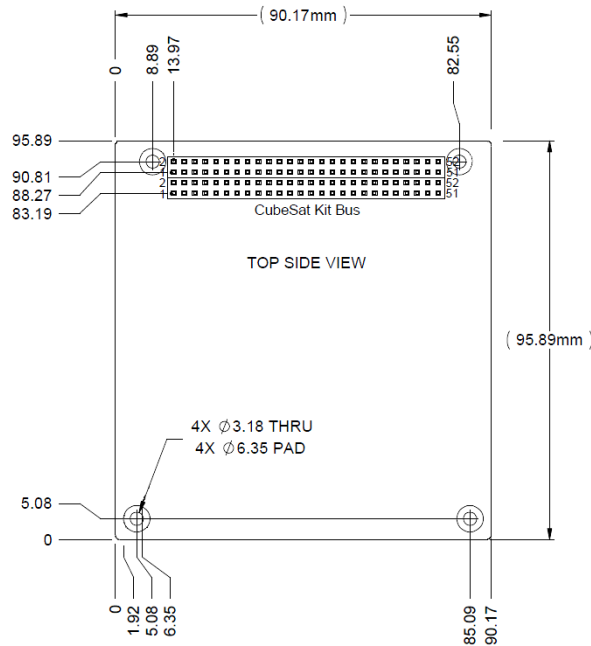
Dimensions of the Mothership board according to PCB CubeSat Standard [24]
